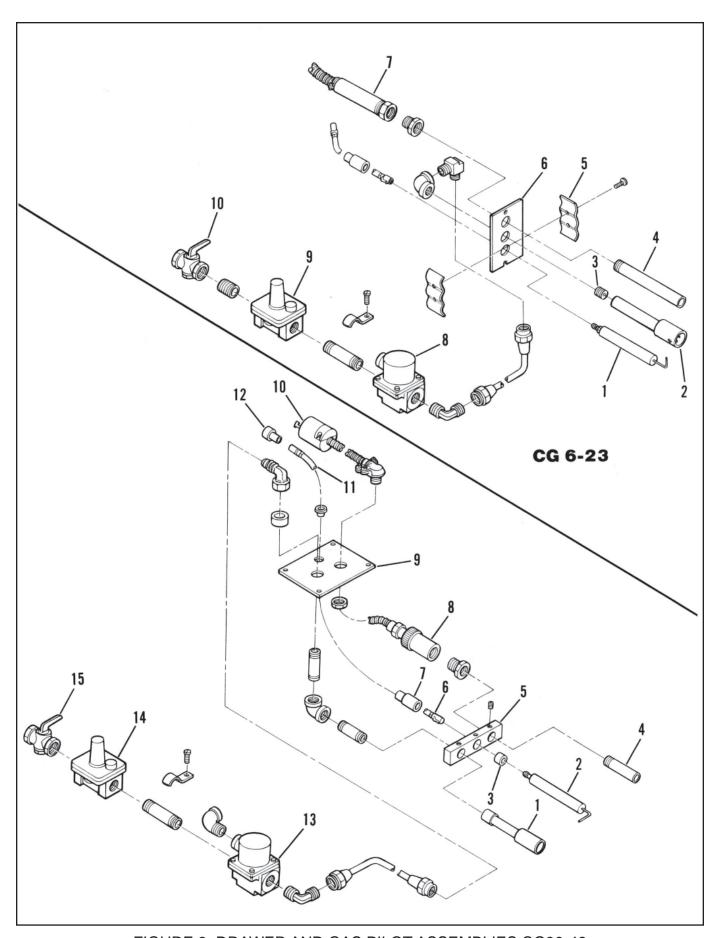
DRAWER AND GAS PILOT ASSEMBLIES CG30-42
